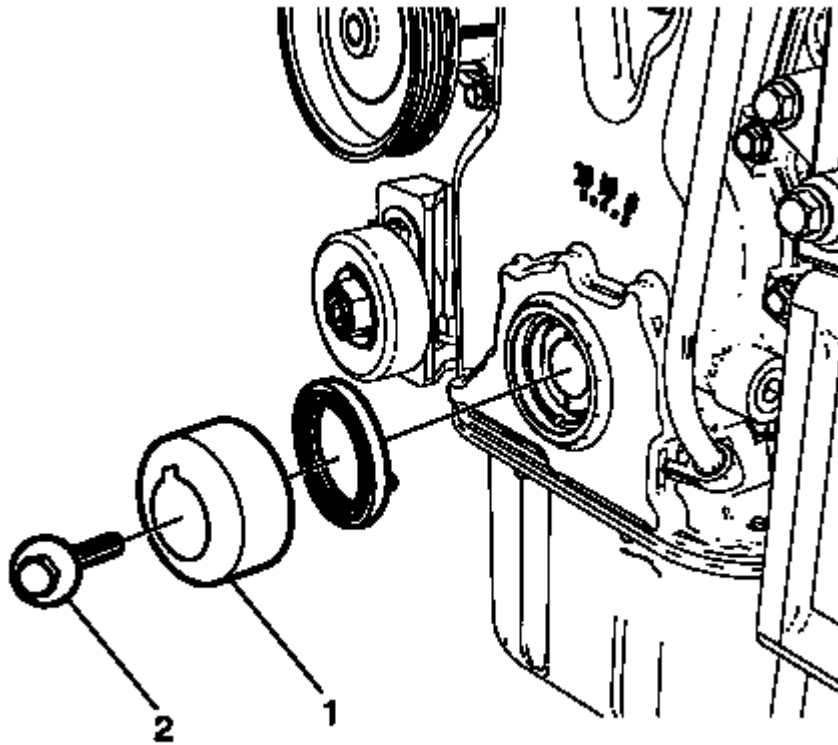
Crankshaft Bolt And Crankshaft Front Oil Seal Installer
